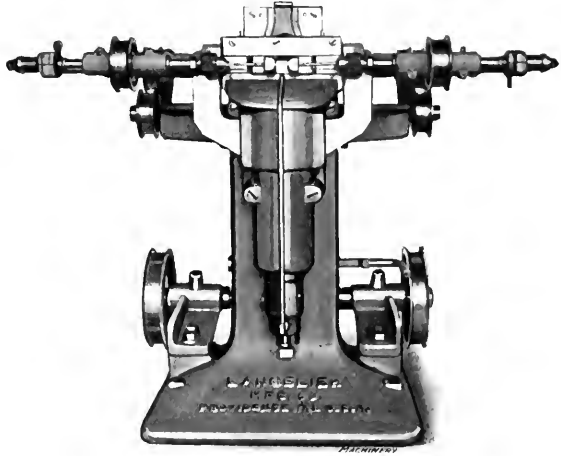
Nearer View of Langelier Opposed Spindle Drill
